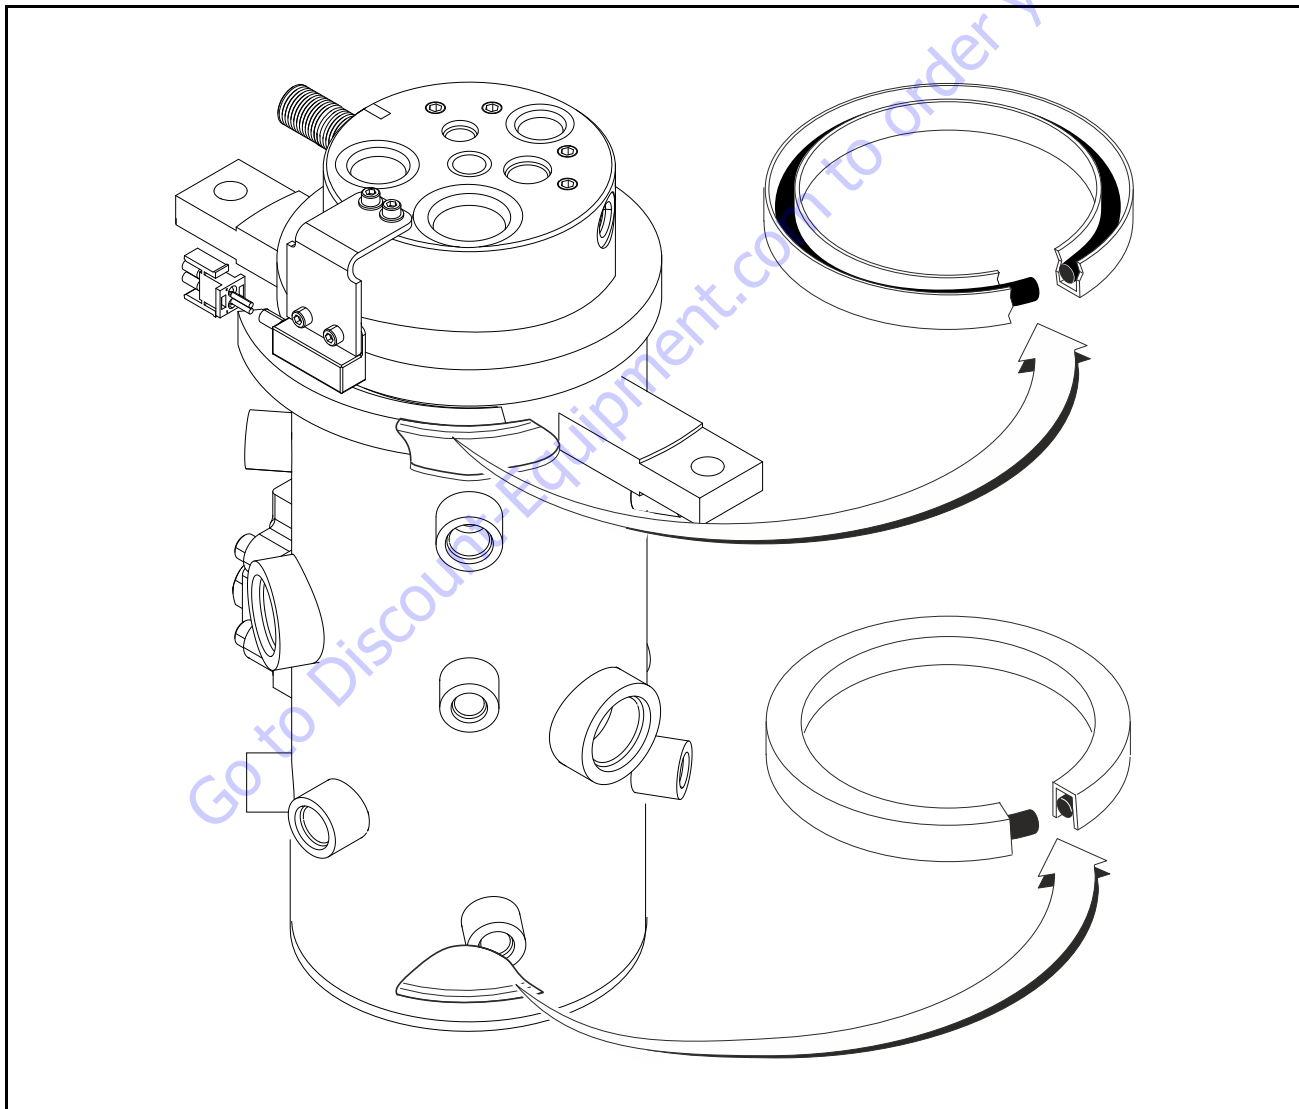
Rotary Coupling Port Location (USA Built Machines, SN 0300087000 through 0300138648) - 4WS
